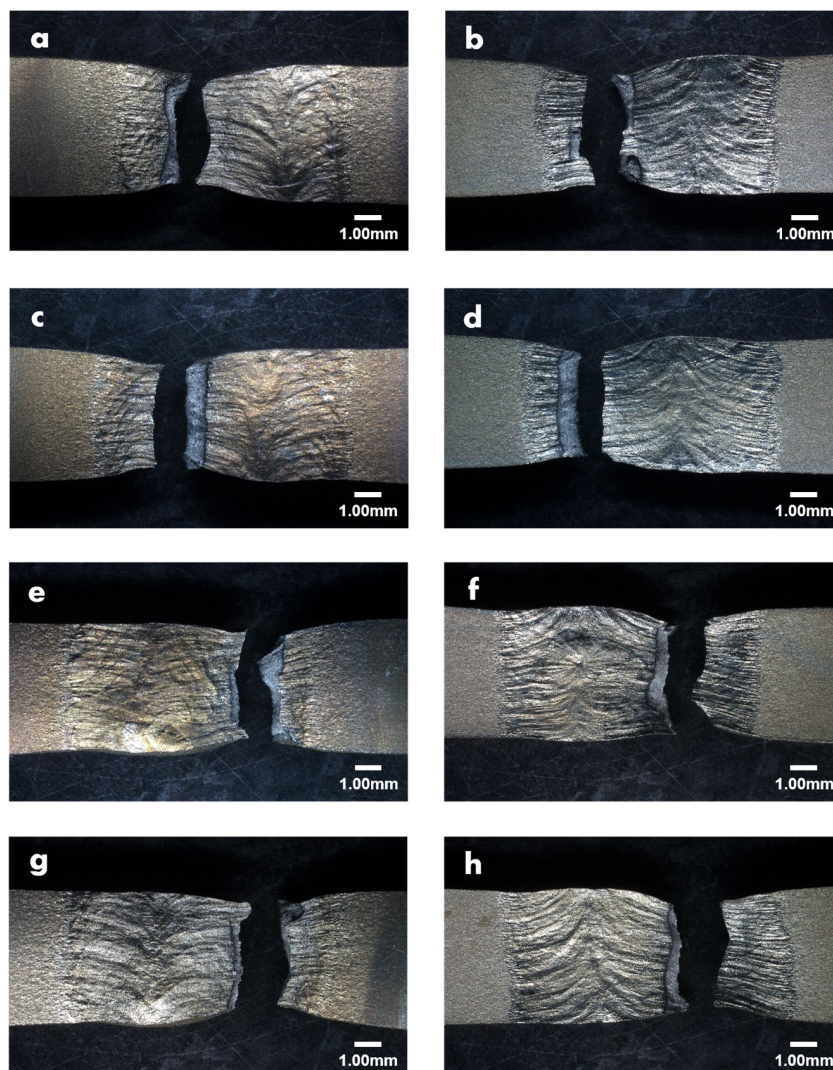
Macroscopic appearance of four cross-weld tensile specimens after fracture: (a,b) Specimen 1; (c,d) Specimen 2; (e,f) Specimen 3; (g,h) Specimen 4—each shown from front and back. All specimens show necking and shear-lip formation near the orbital GTAW weld. Scale bars: 1.00 mm.
